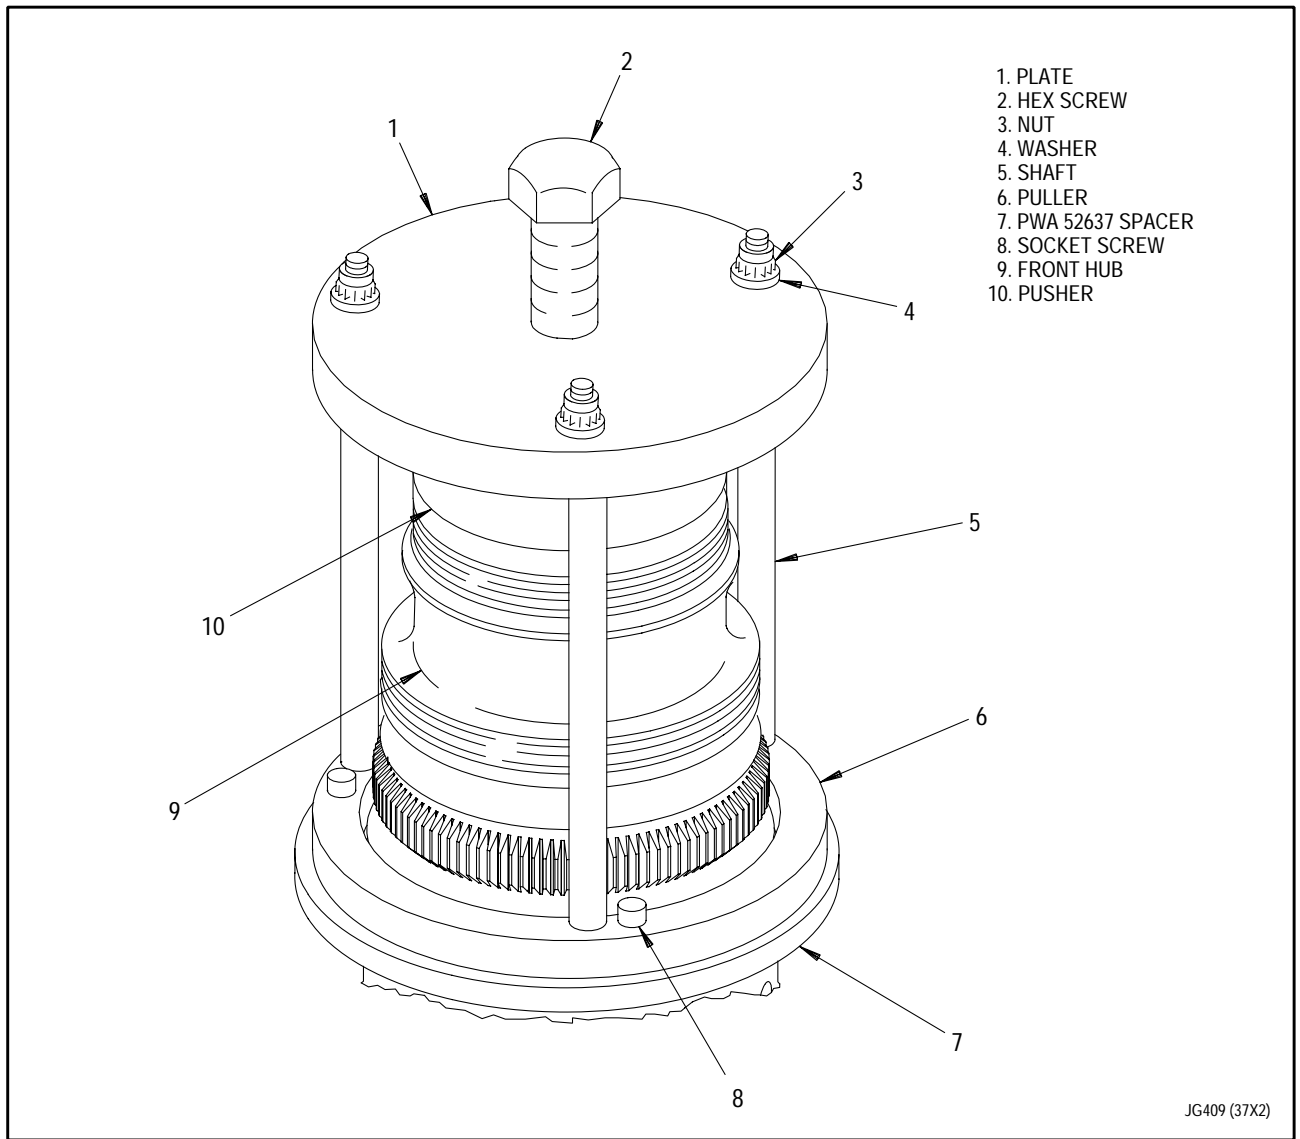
Rear Compressor Rotor Assembly Front Hub Balance Bearing, Spacer, and Adapter - Disassembly With PWA 50910 Puller
